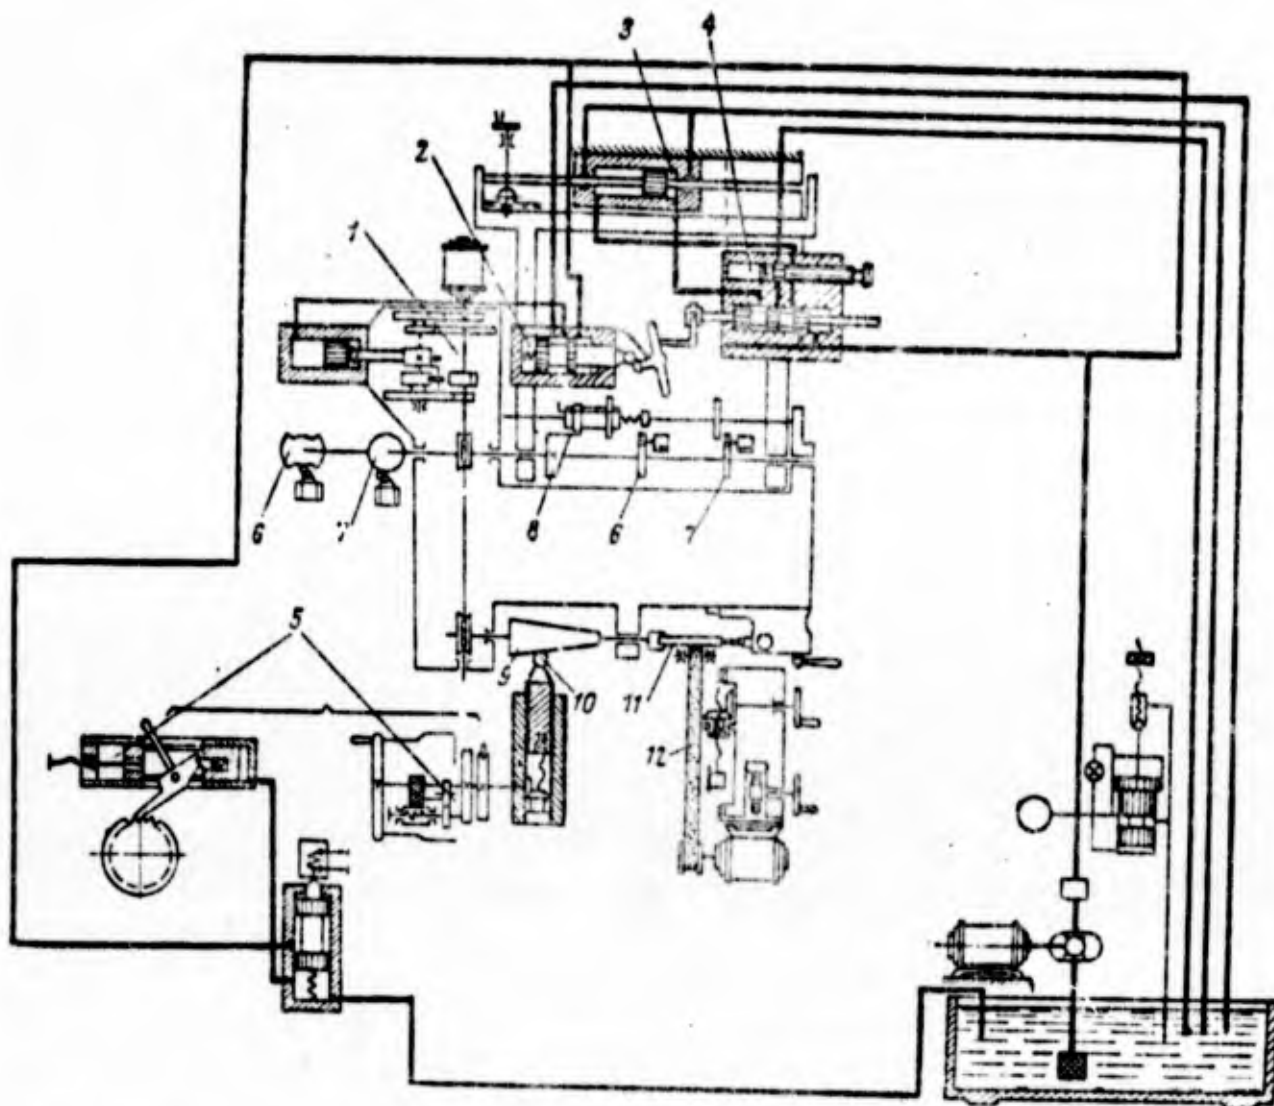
Belt grinding copying machine of model LSh-1. 1) mechanism of line feed and bypass; 2) line feed valve; 3) hydraulic cylinder for longitudinal shift of table; 4) reverse valve; 5) feed mechanism for incision; 6) master form of bypass; 7) form for incision; 8) butt form for working chamfer at root; 9) three-dimensional master form; 10) working roller; 11) worked blade; 12) abrasive belt.
